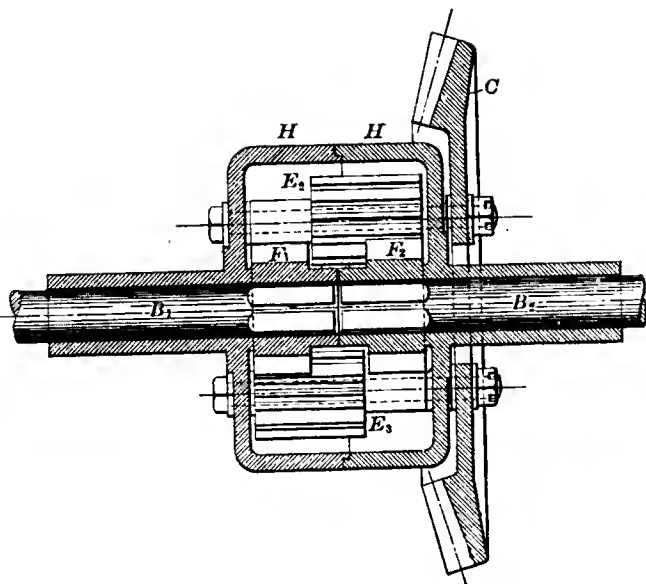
SECTION IN PLAN THROUGH SPUR GEAR DIFFERENTIAL CASING.
